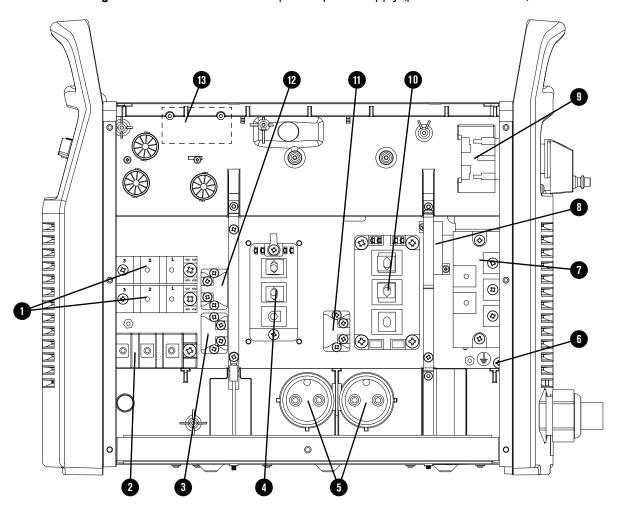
200 V - 600 V CSA plasma power supply (power PCB removed)
